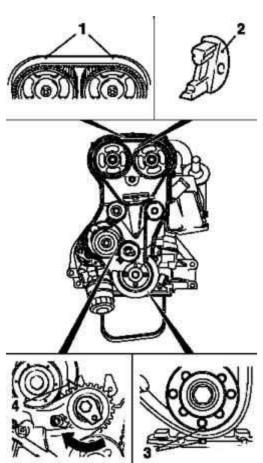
Adjust the toothed belt: 1 - marks on the lid of the cylinder head, 2 - a special tool, 3 - mark the first cylinder; 4 - pointer regulator
